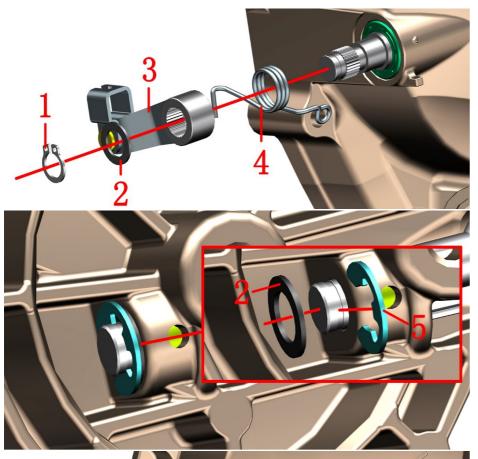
RIGHT CRANKCASE		Disassembling the clutch lever	CHK	(0)
